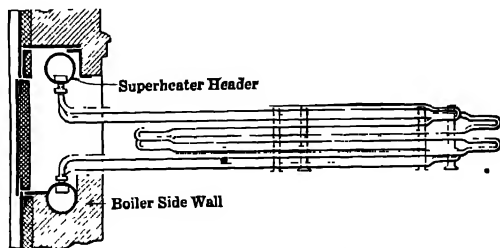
Assembly of Elesco Superheater — Side Elevation.
